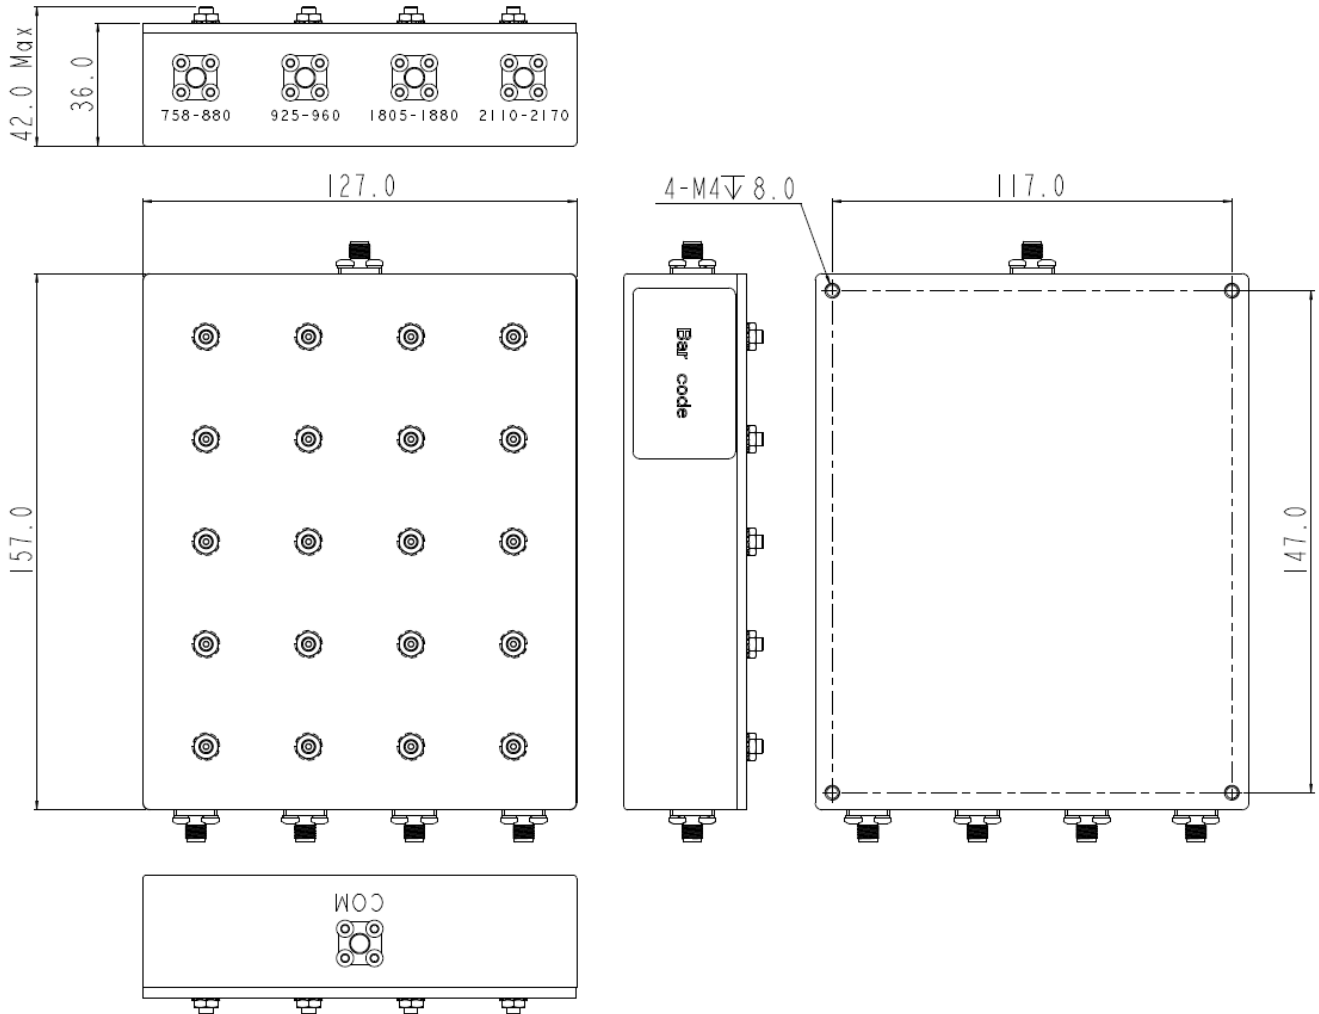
JX-CC4-758M2170M-20S1 front panel layout
